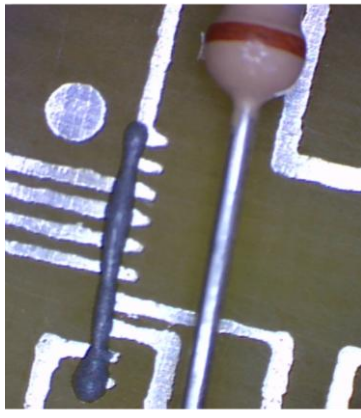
F: The top line of solder is "about right". There is too much on the bottom.
